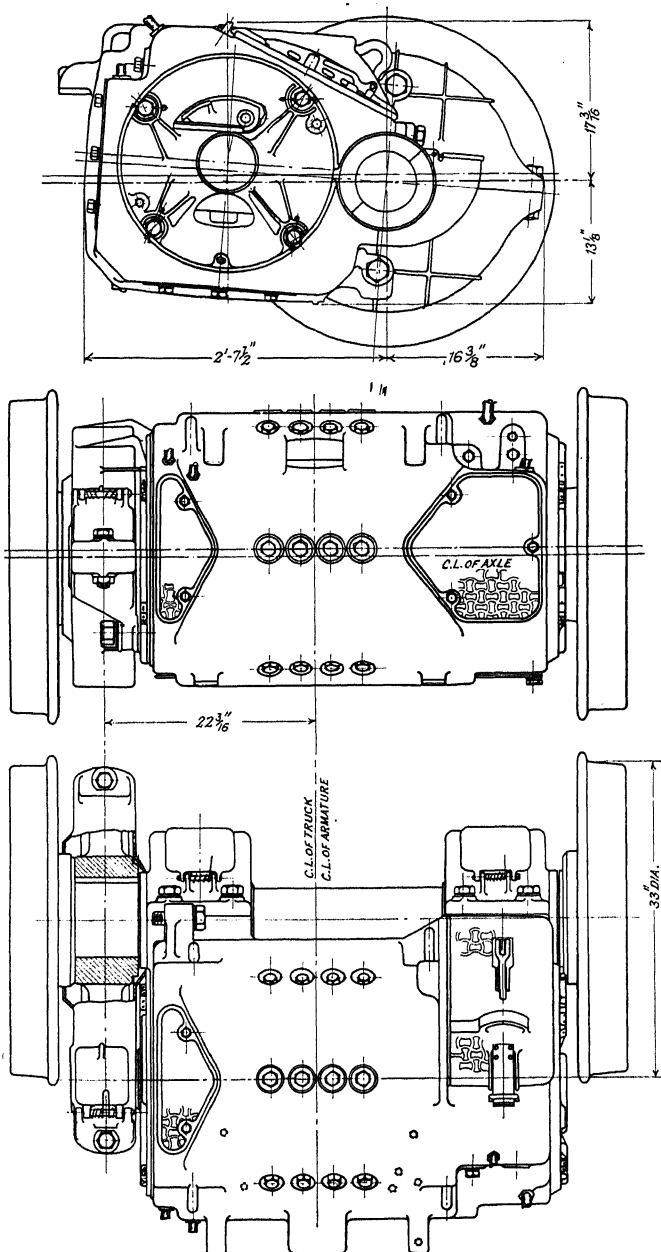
Assembly Drawing of Ordinary Geared Motor.
